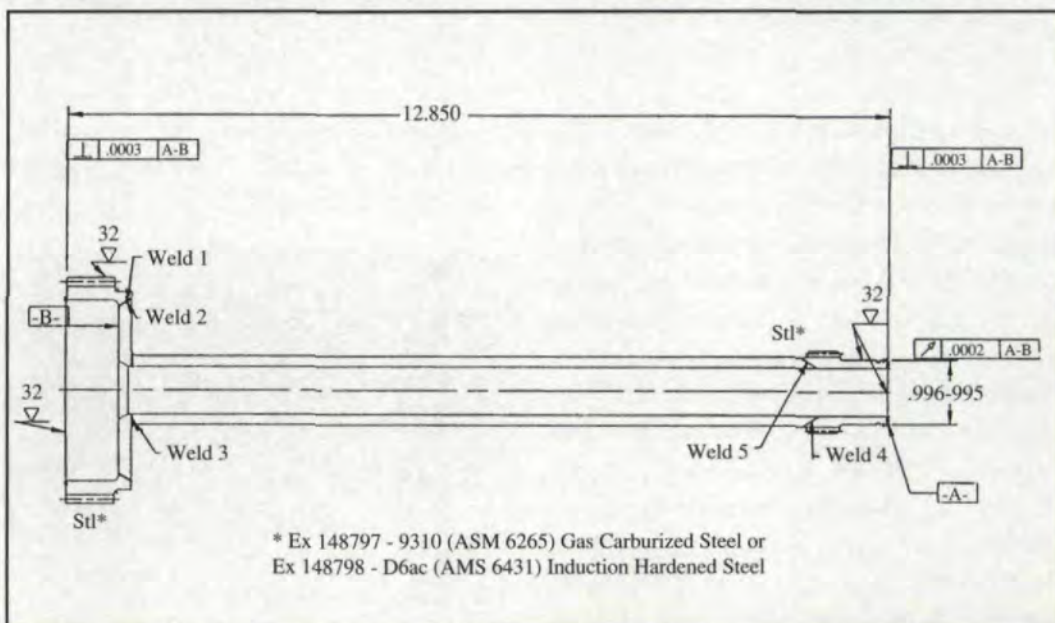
Allison 250-B17F multi-metal sun gear shaft weld locations.
